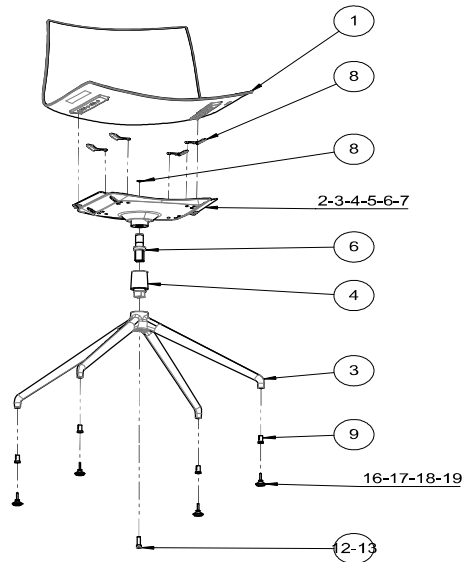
Exploded view of Catifa 46 chair with trestle base.
